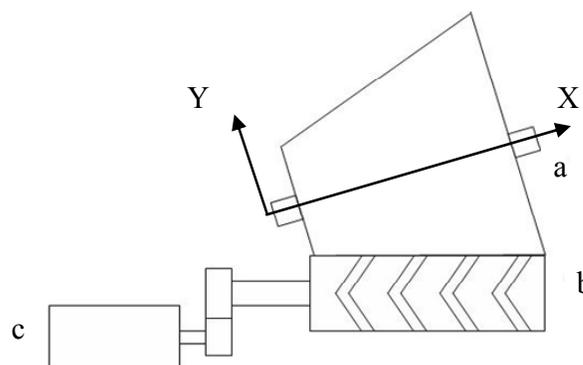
Random cone system [(a) conical package, (b) grooved drum and (c) motor]
